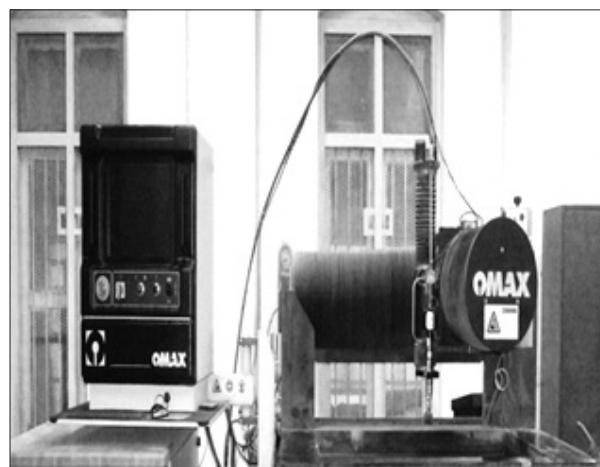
Photograph of AWJ machine PC based controller for nozzle movement of the jet (Front view).
